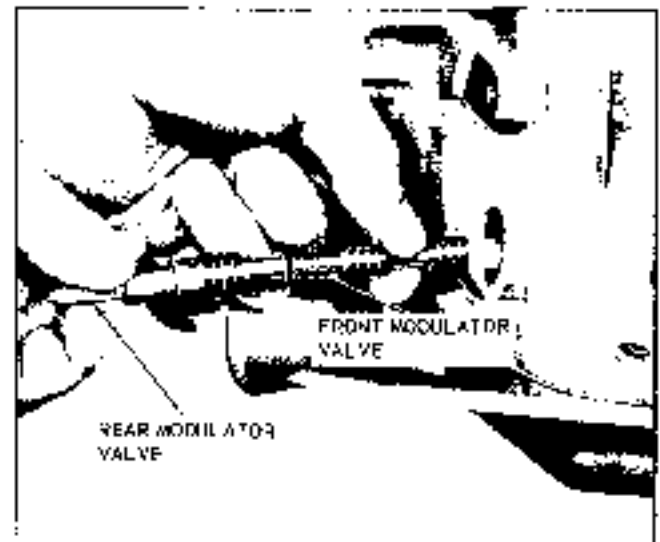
F-16 Removing Vacuum Modulator Valve Assembly
